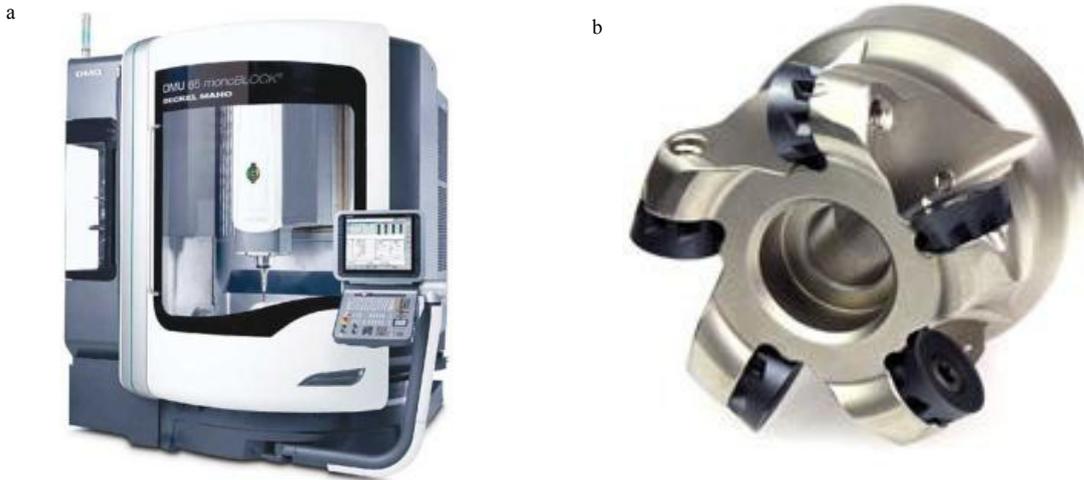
(a) DMG/Mori Seiki UmB 65 [7]; (b) Milling cutter  $\varnothing 50$  [8].
